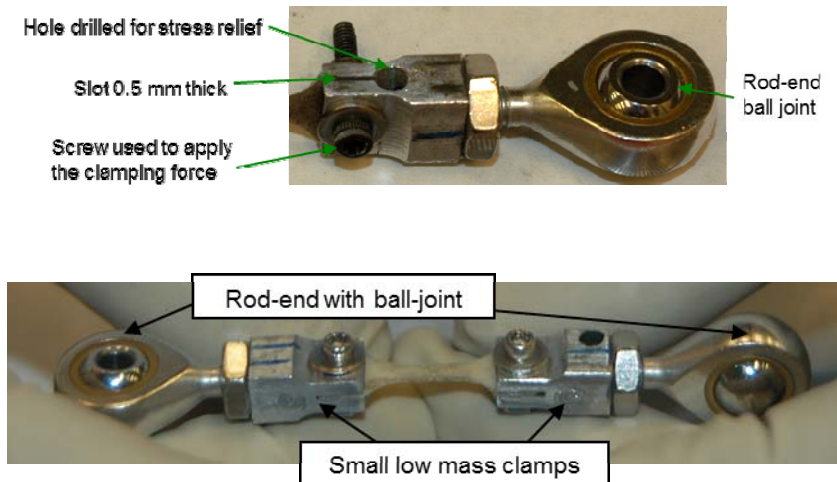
Clamps designed to hold the coupon to prevent misalignment.
